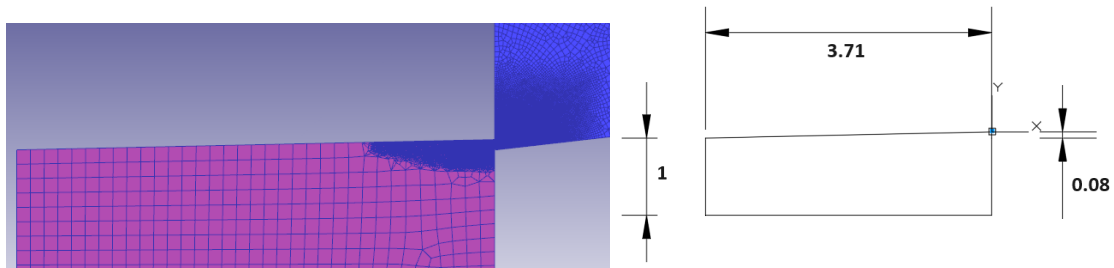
Geometry of the workpiece used in the 2D numerical model for representing the down-milling mode
